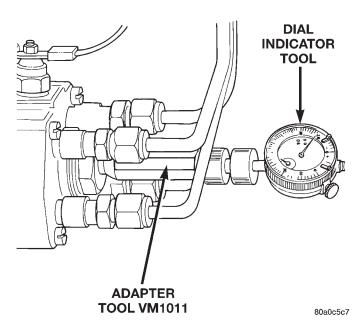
Installing Dial Indicator and Special Adapter Tools
